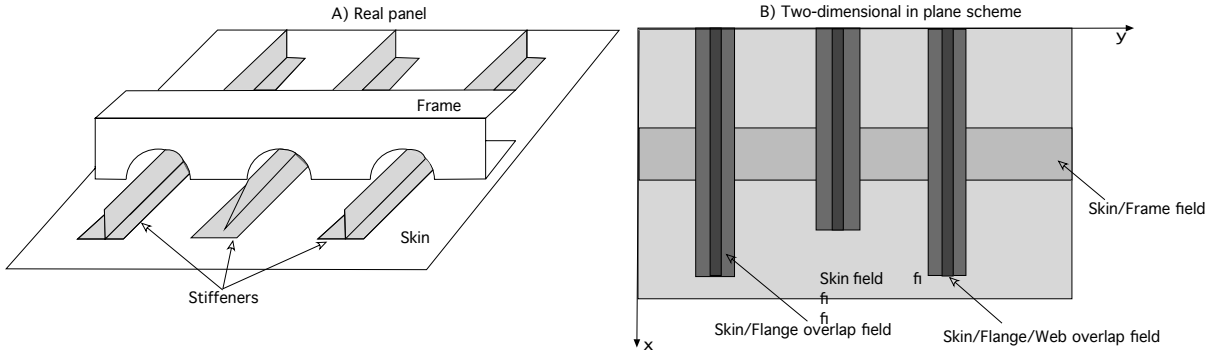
Example of the skin/stringers/frame multibay assembly. Left: realized structure; right: in-plane projections.
